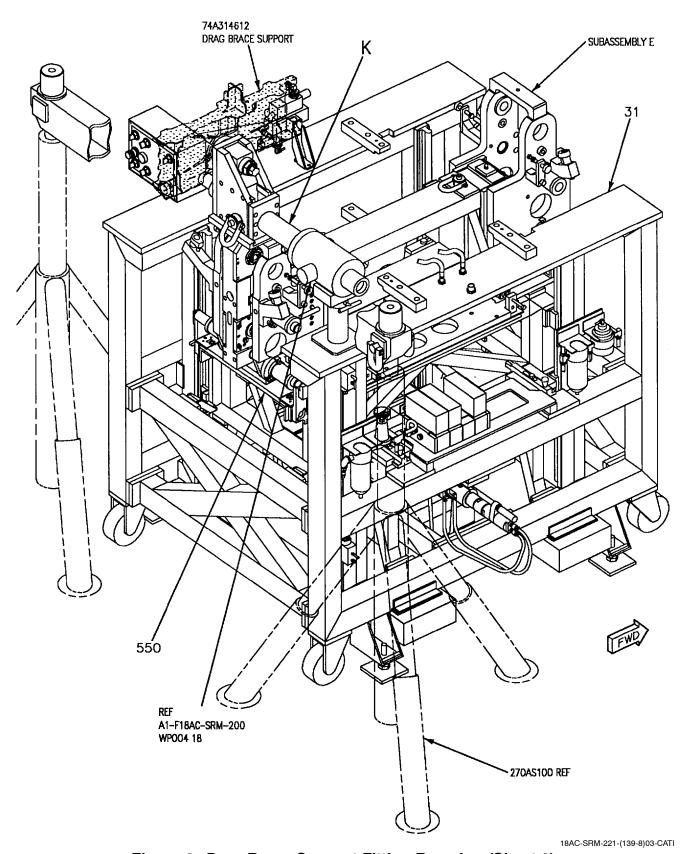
Drag Brace Support Fitting Reaming (Sheet 8)
